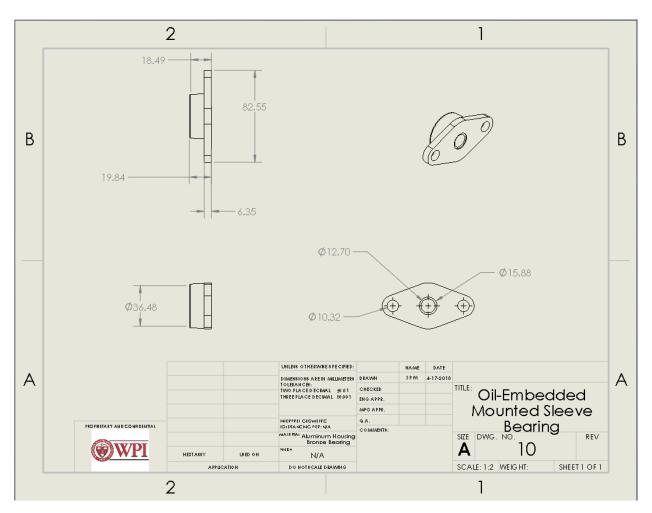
Oil-Embedded Mounted Sleeve Bearing.
